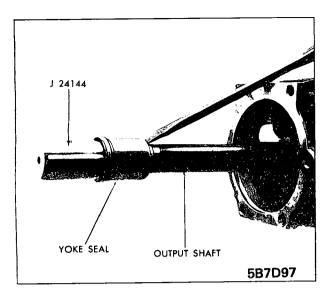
D-232 - Removing Slip Yoke Seal (THM 375)
